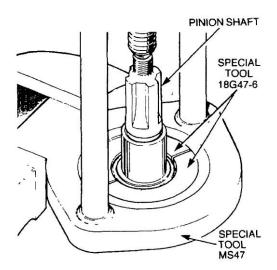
Removal of the Pinion Shaft Inner Bearing Cone
